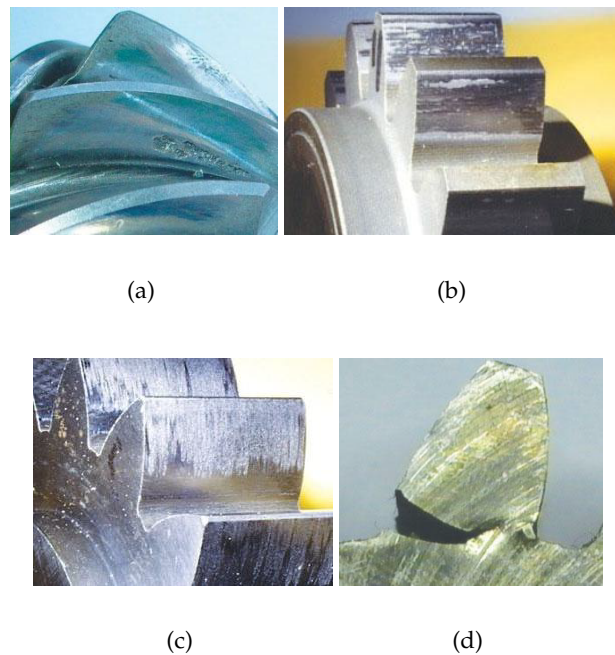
Typical gear failures: 2.15(a) pitting, 2.15(b) micropitting, 2.15(c) scuffing, 2.15(d) root crack. Reproduced from [34].
